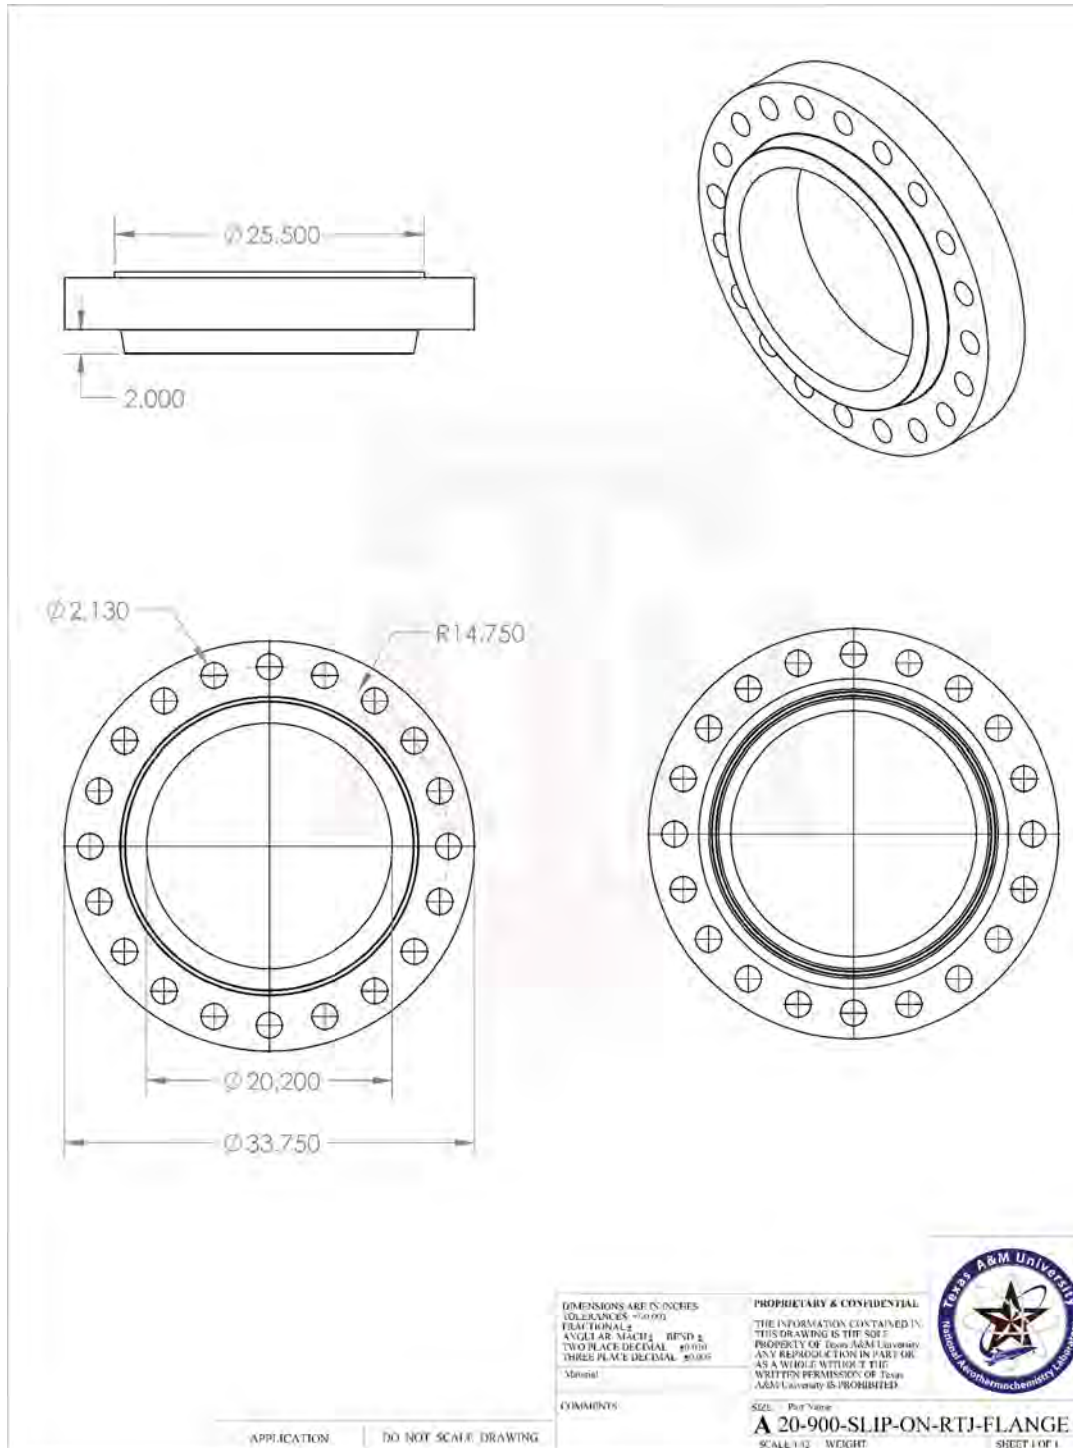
DIMENSIONAL DRAWING FOR A 20-IN CLASS 900 RTJ SLIP-ON FLANGE.
